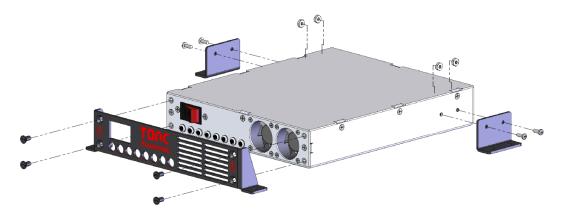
Exploded assembly of the standalone PowerHub mounting option.
